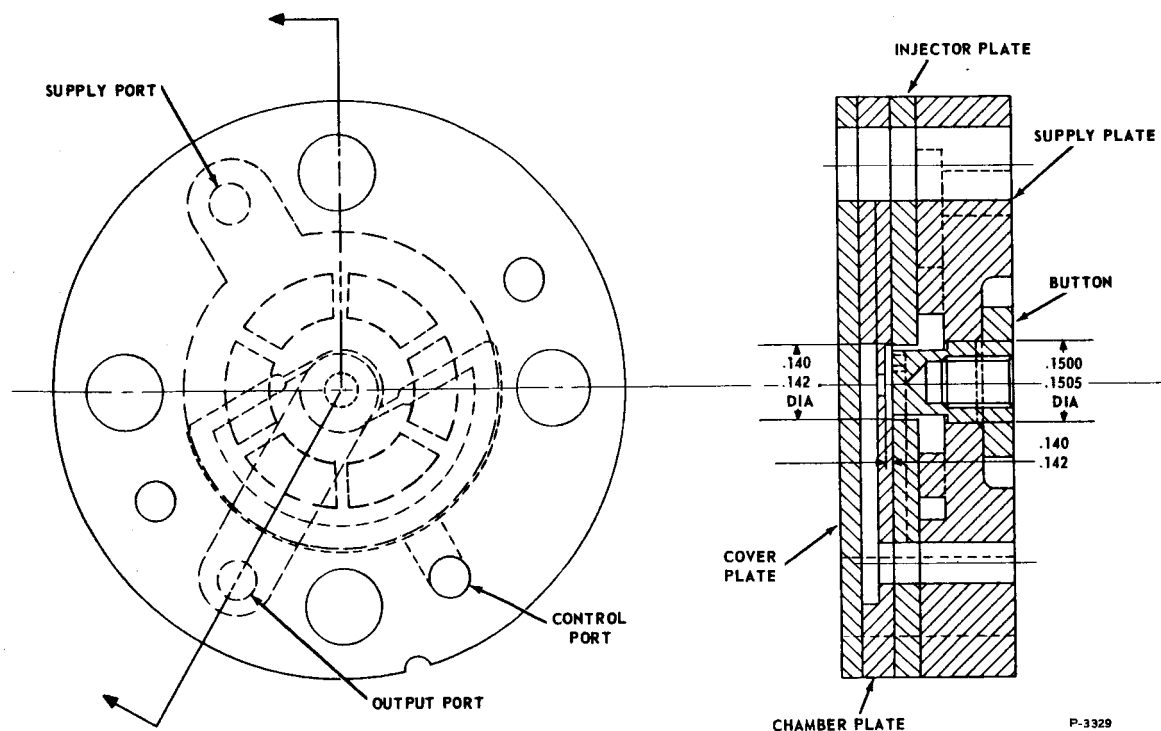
Assembly Drawing of Breadboard Vortex Amplifier
